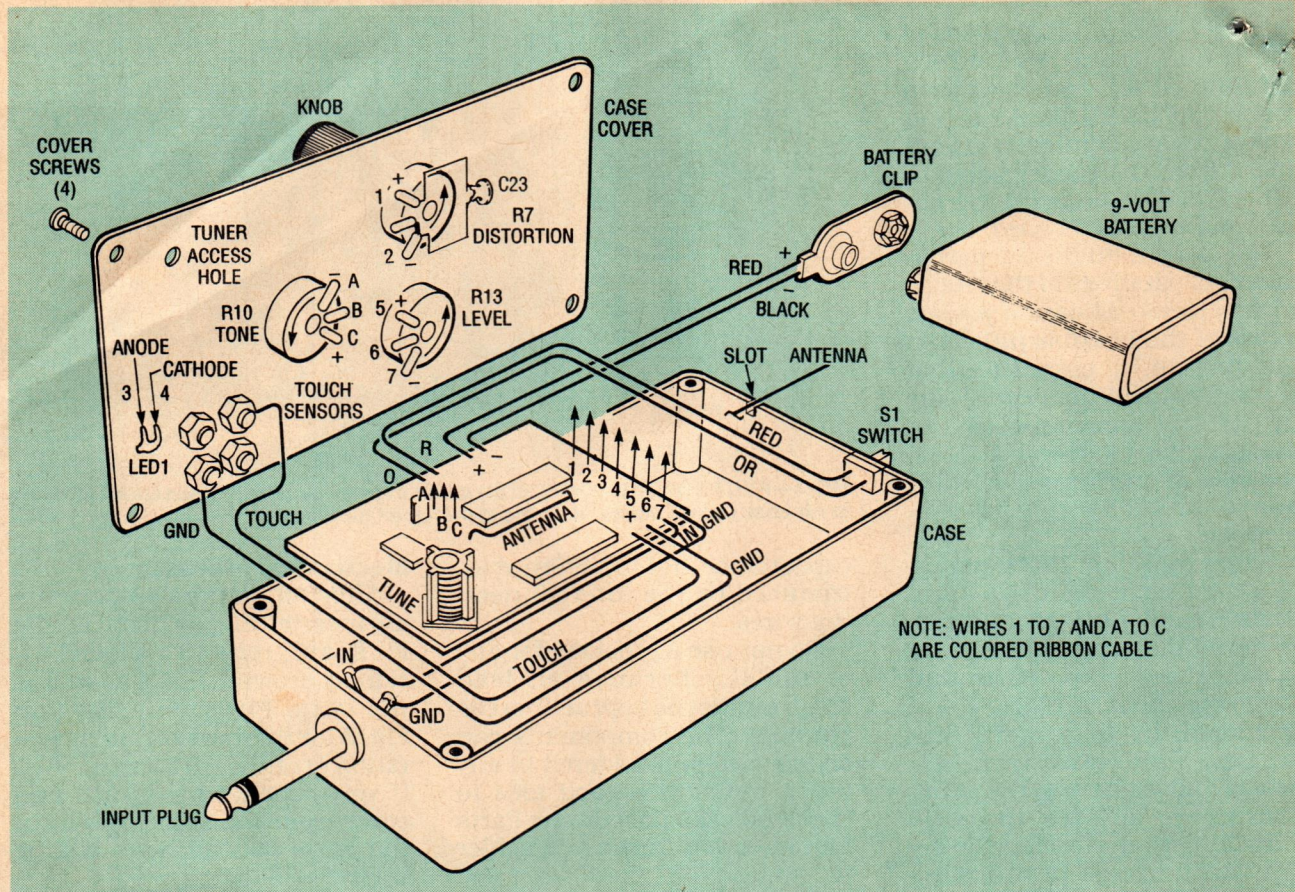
EXPLODED VIEW OF THE TRANSMITTER showing the locations of the off-board components and wiring. The input plug attaches the transmitter to the guitar.
